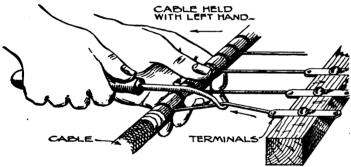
Drawing up wires after soldering into terminals. This final operation also serves as a test for defective soldering and nicked or broken wires.
